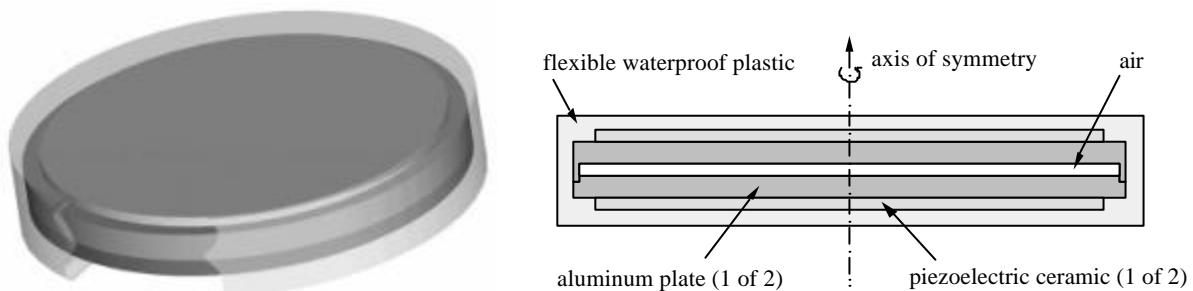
Isometric and Cross-Sectional Views of a Bender.
